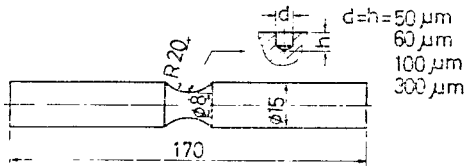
Geometry of fatigue test specimen(unit: mm)
